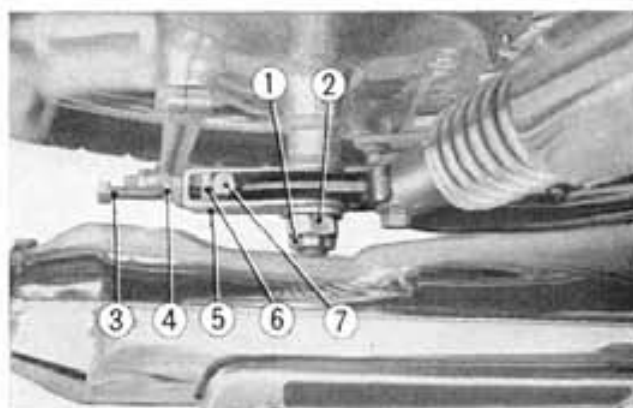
① Cotter pin ⑤ Chain adjuster
